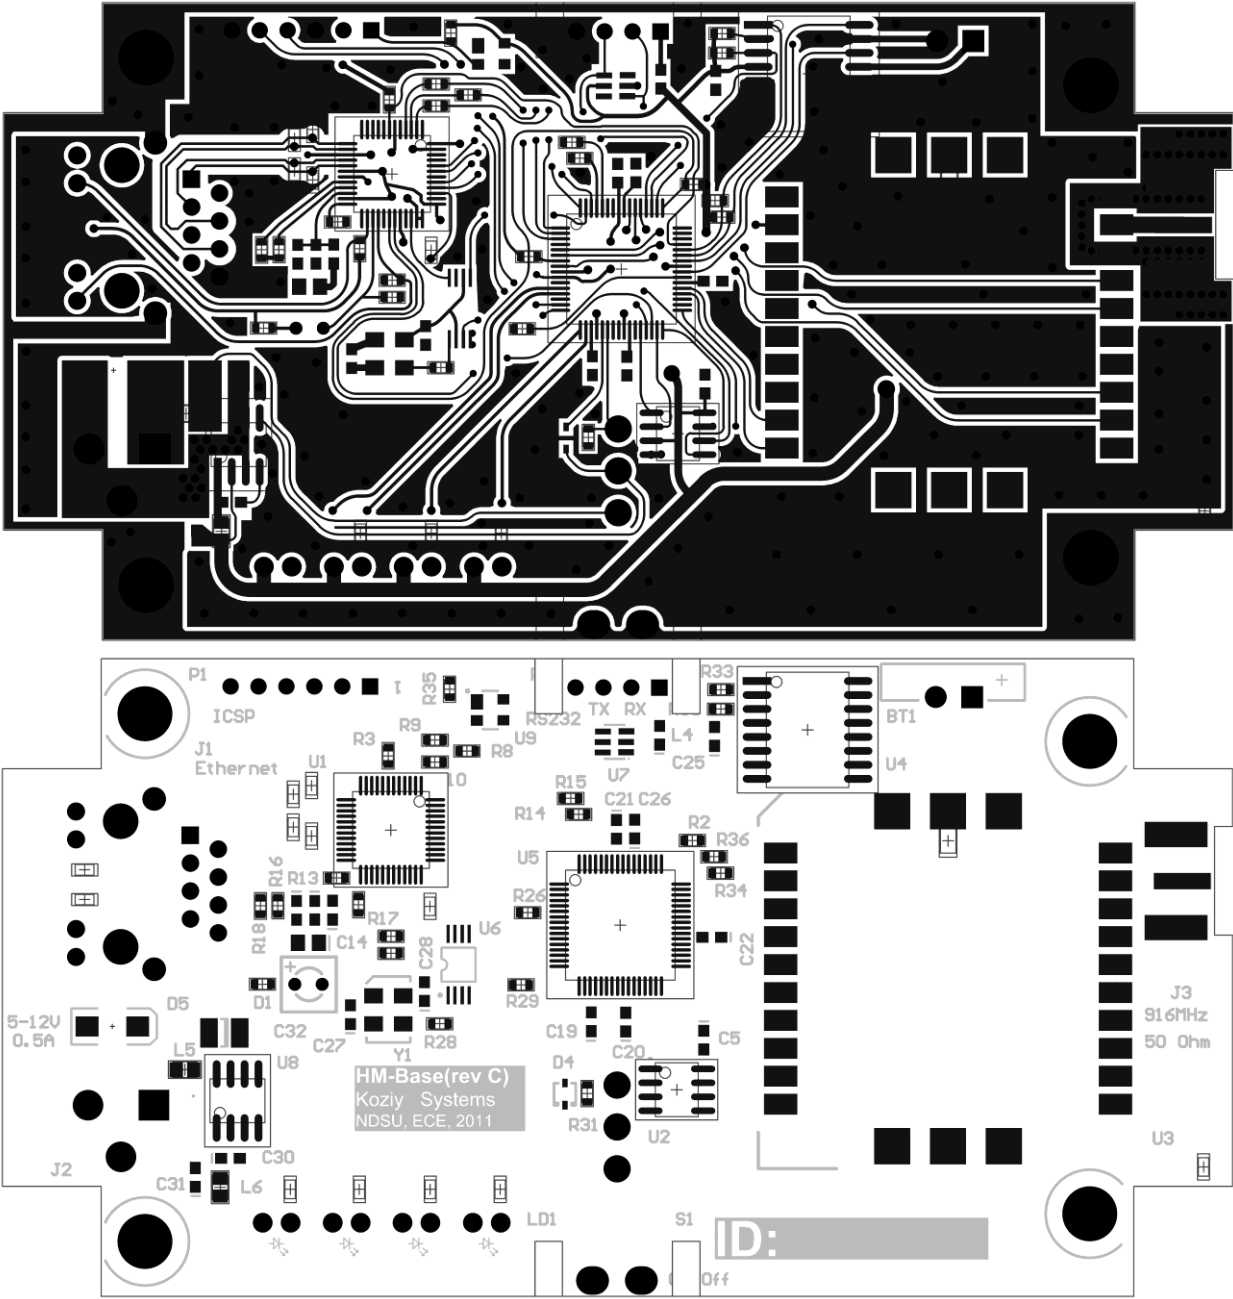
The Base PCB layout (copper and silk screen with pads, top layer).
